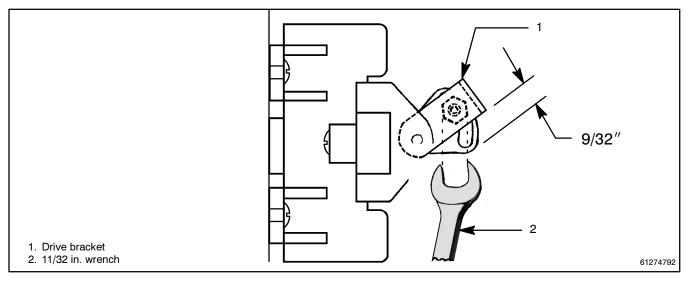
Adjusting TS Control Contacts 69–70 and 7–6. View from left side of TS control contact assembly. Main transfer switch contacts must be closed on normal side.
